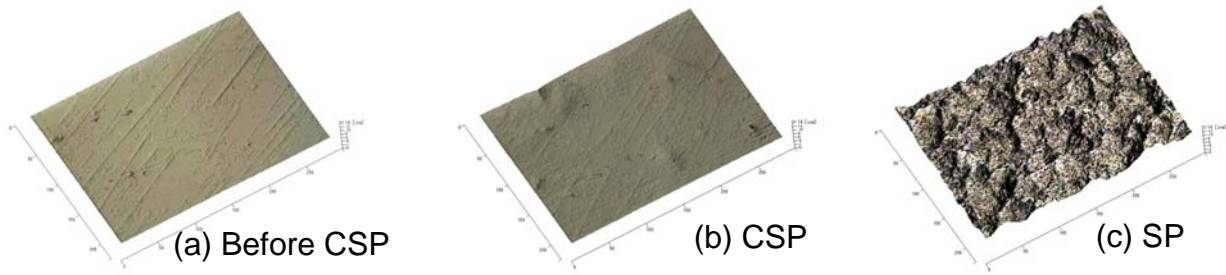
Aspect of surface of tool alloy steel (JIS SKD61)
